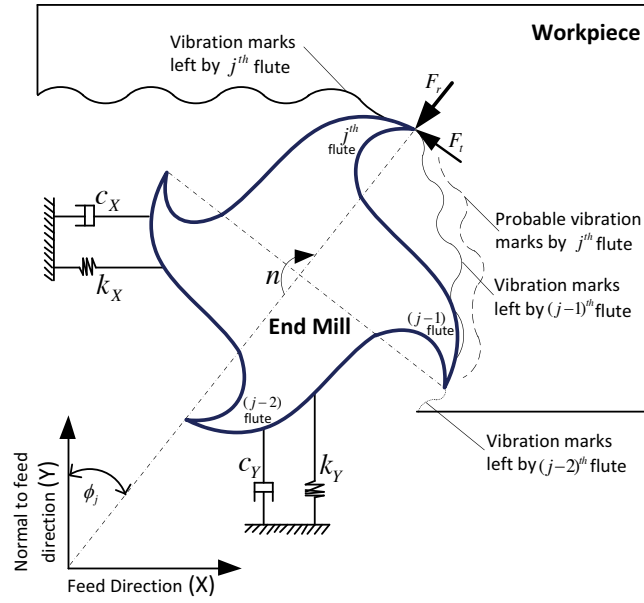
Flexible machine tool system, redrawn from (Altintas and Budak, 1995)
